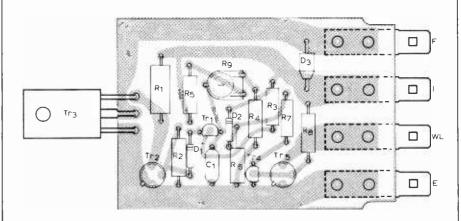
Component-mounting board is mounted in die-cast box which is also used as heat dissipator for Tr_3 (insulated by mica washer). M. R. Sagin, of 23 Keyes Road, London, NW2 plans to supply boards for £1.65 inclusive.
